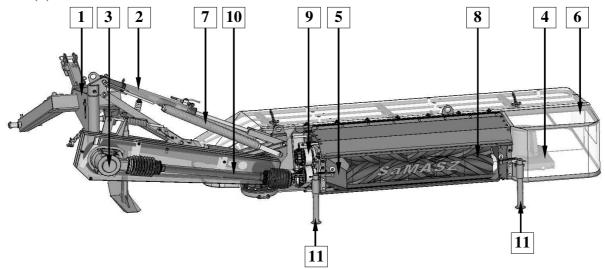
Parts of SaMASZ rear disc mower with tine conditioner
